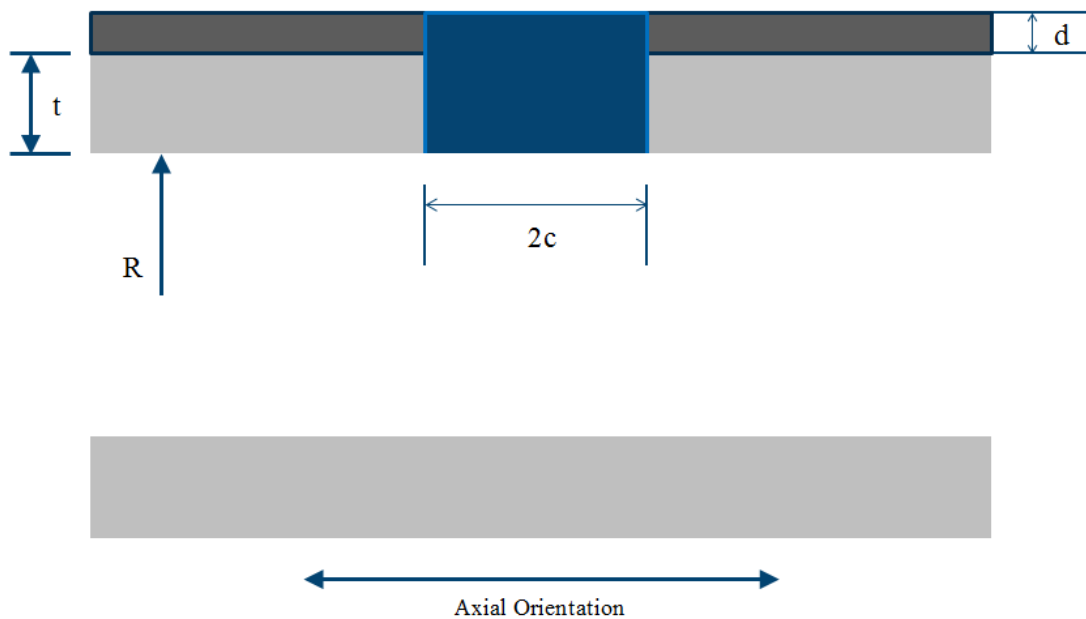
2D Planar Sketch of a Through-Wall Crack
